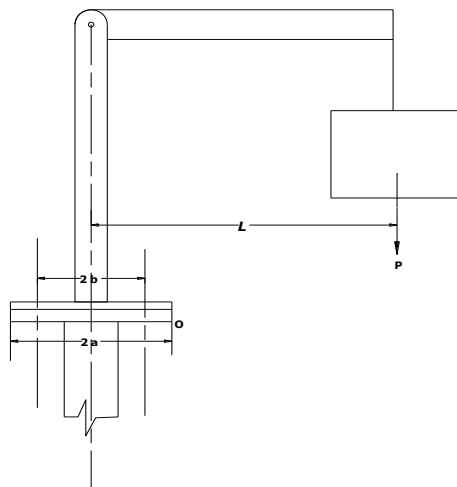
Schematic Diagram of the Existing Crane Bolted to the Flange of the Shaft
